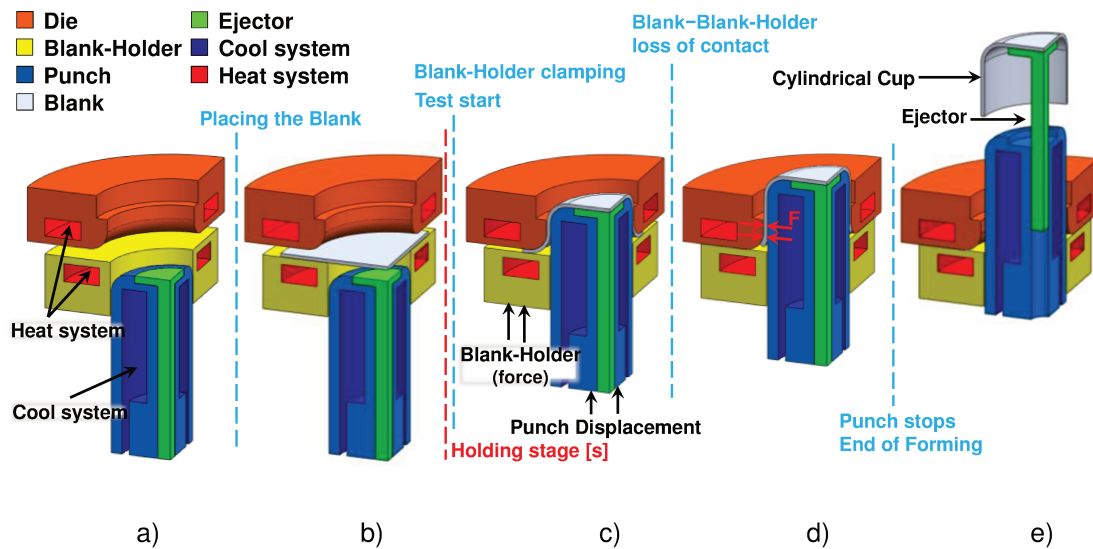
Drawing of a cylindrical cup: a) Heating the die and the blank-holder, while the punch is kept at RT by the water cooling system; b) Blank heating; c) Cup drawing stage; d) Ironing stage; and e) Ejection stage.
